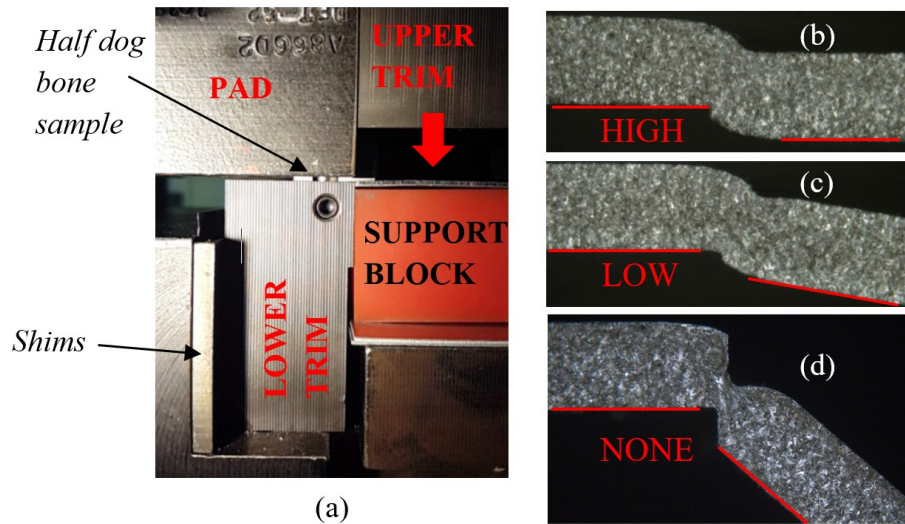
(a) Experimental press side view showing main operational trimming tools: pad, lower & upper trim, and support block. Press has pad closed on a half-dog bone specimen and the upper trim tool is in motion downward to complete a trimming operation. Shims behind the lower trim tool control clearance by positioning the lower trim tool relative to a fixed upper trim tool. (b) (c) & (d) shows microscopic images of partially trimmed aluminum sheet metal at the onset of fracture, showing different levels of offal rotation due to offal support with urethane blocks: (b) high, (c) low, and (d) no support.
